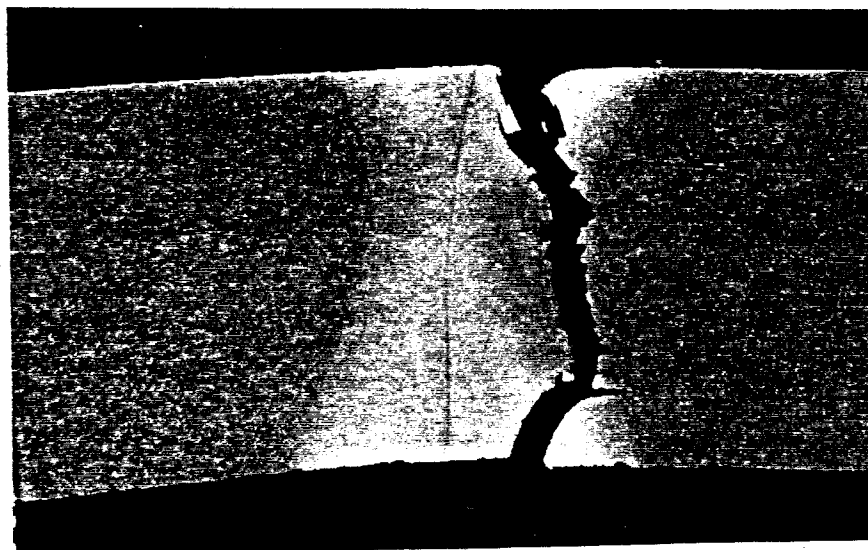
HOOK CRACKS, HF ERW SEAM
